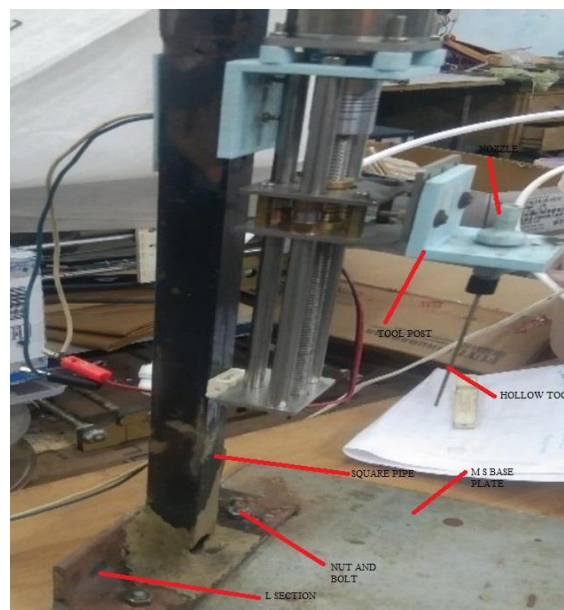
(2) STRUCTURAL Z AXIS DRIVE ASSEMBLY
